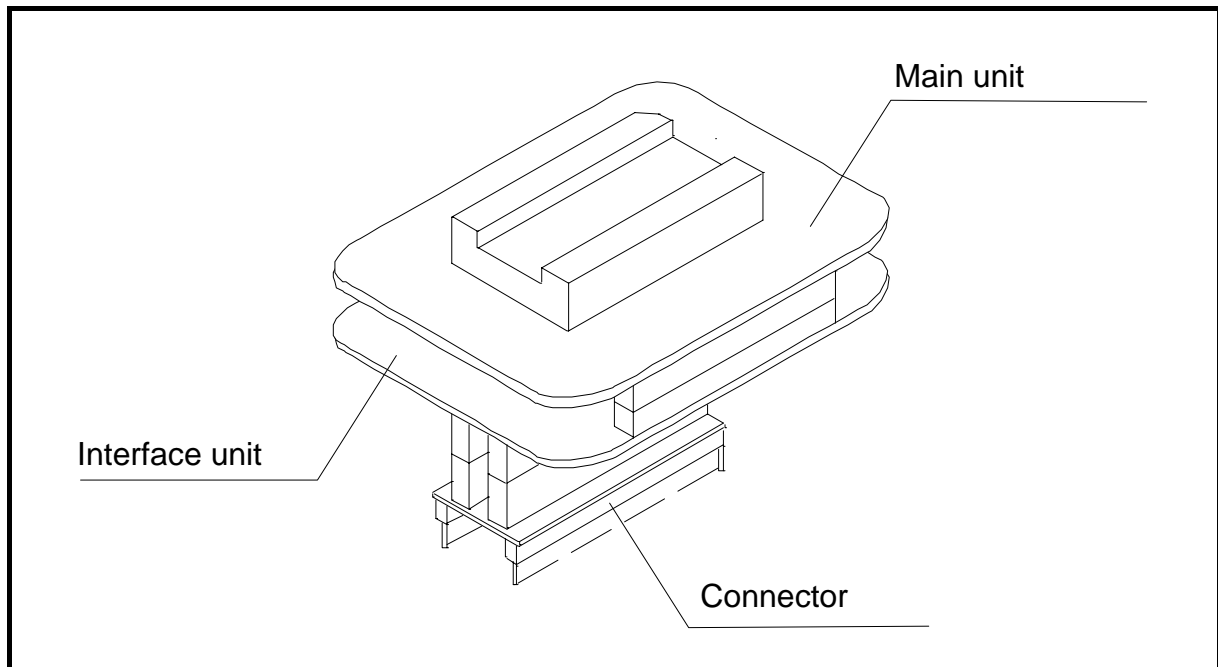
External view of the programming adapter (DIP type IC socket) and constituent parts
